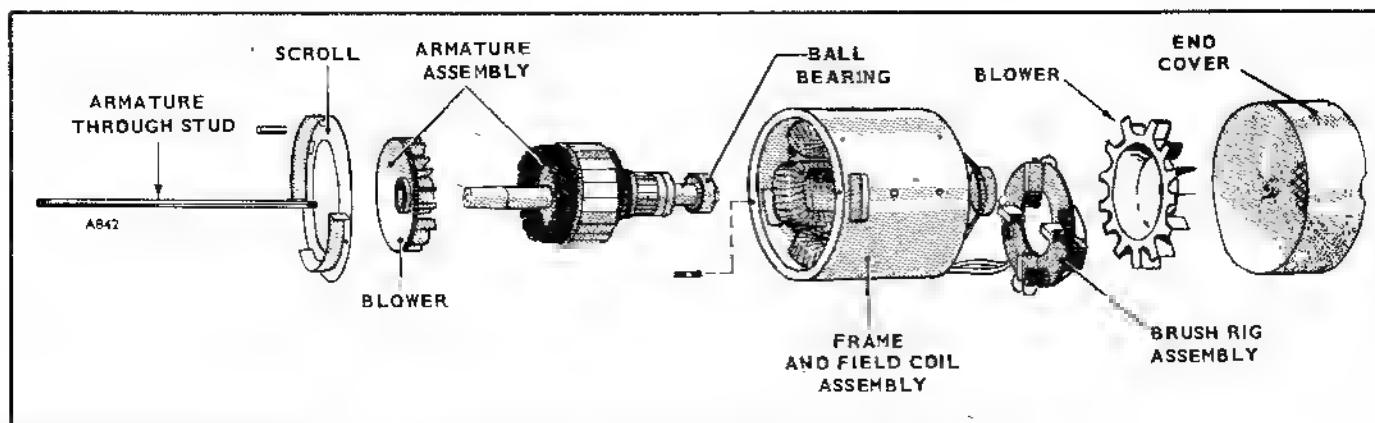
GENERATOR DISASSEMBLY (BEFORE SPEC J)
